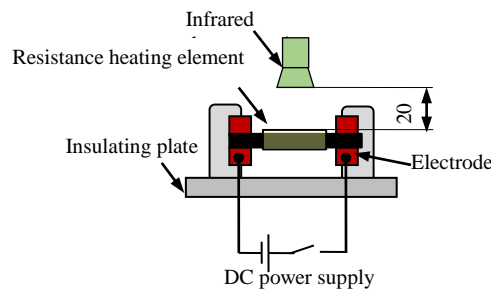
Schematic drawing of resistance welding method using spread-CF or woven-CF heating elements.
